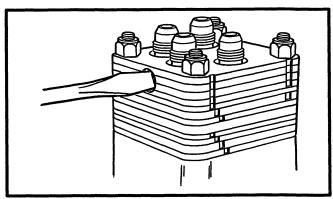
SERVICE FIXTURE ASSEMBLY
